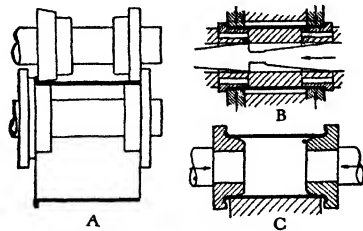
Flanges as formed (*A*) in rolls, Fig. 99; (*B*) by expansion, Fig. 101; (*C*) by end thrust, in special machines not shown.
